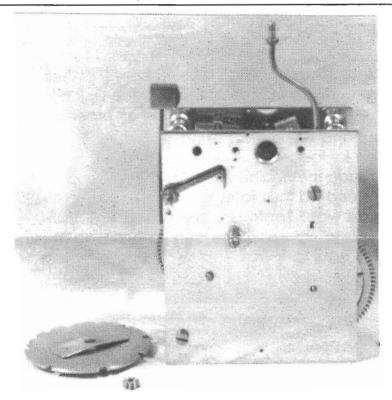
Rear plate of example with count wheel/locking plate and pinion of report removed.
